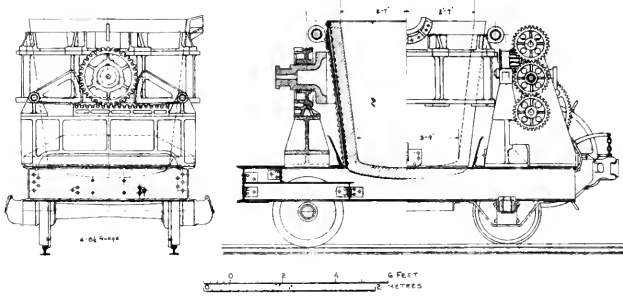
15-TON HOT-METAL LADLE CAR.
